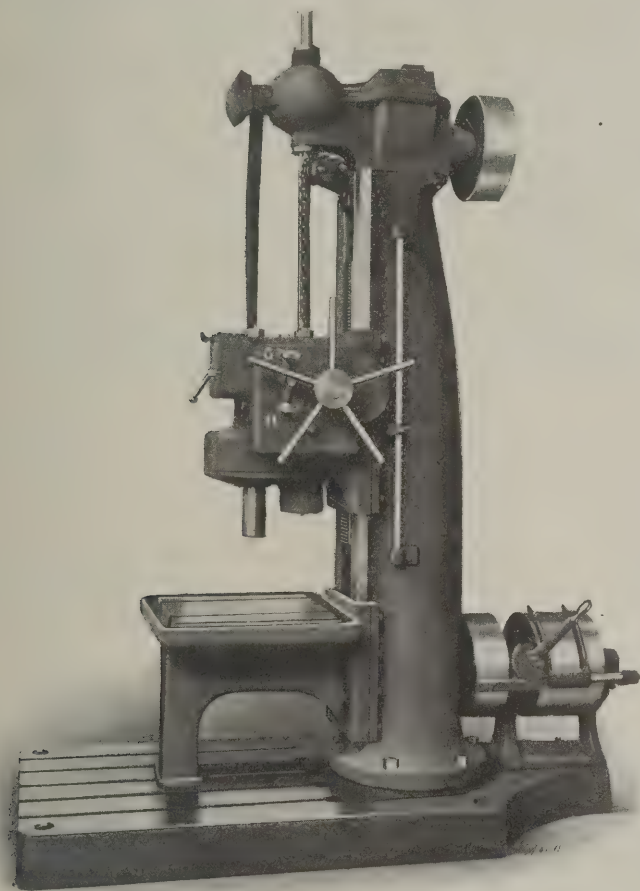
Boring, Drilling and Tapping Machine, built by Western Machine Tool Works
